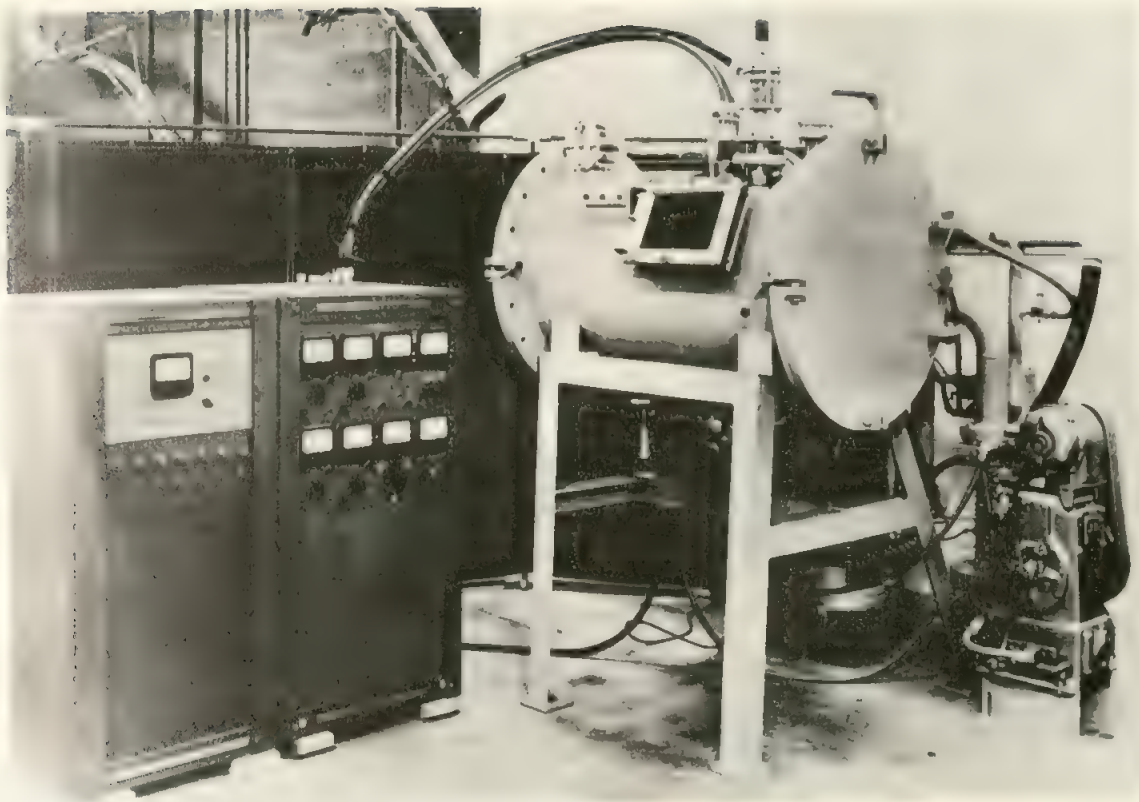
Electron beam low-power welding equipment.
